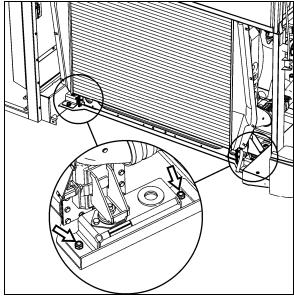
RADIATOR ASSEMBLY LOWER MOUNTING FASTENERS
